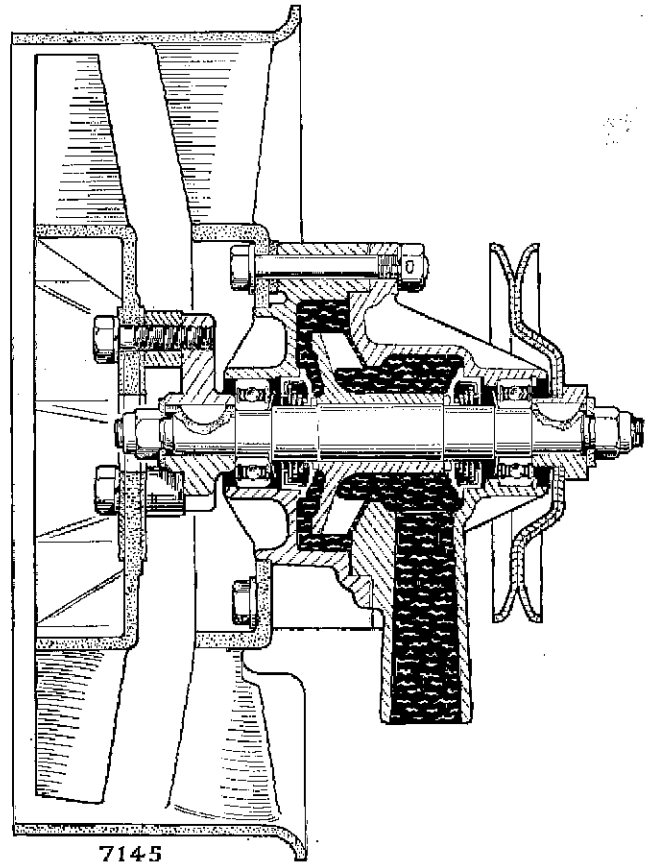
Sectioned view of water pump and fan assembly. (Early models)
